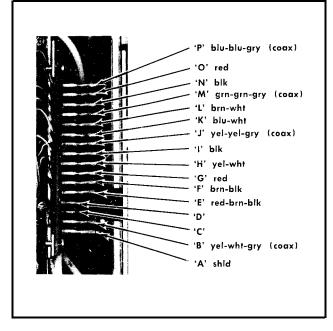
Honeycomb assembly and wire color code to the pin connector.
